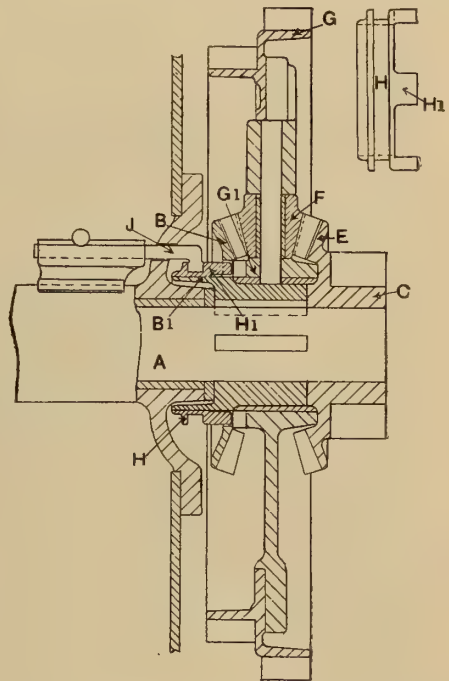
THE BURRELL LOCKING ARRANGEMENT FOR THE COMPENSATING GEAR
